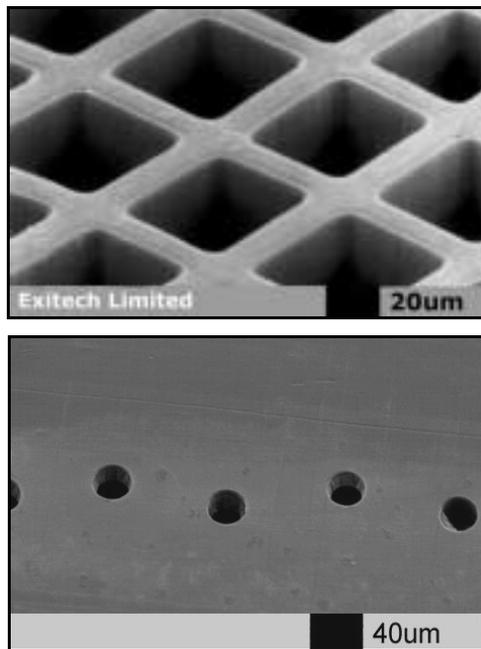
(a) Micro-machining of polyimide and (b) ink-jet printer nozzles, both produced using excimer laser mask projection.
